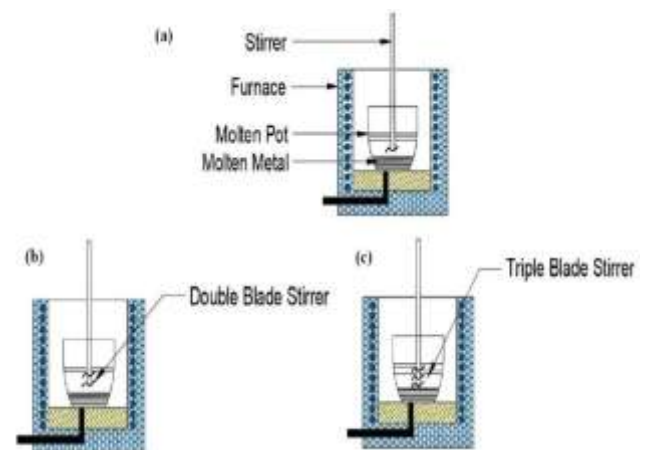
Stirring Mechanism[63]. (a) Single blade stirrer, (b) Two blade stirrer, (c) three blade stirrer.
